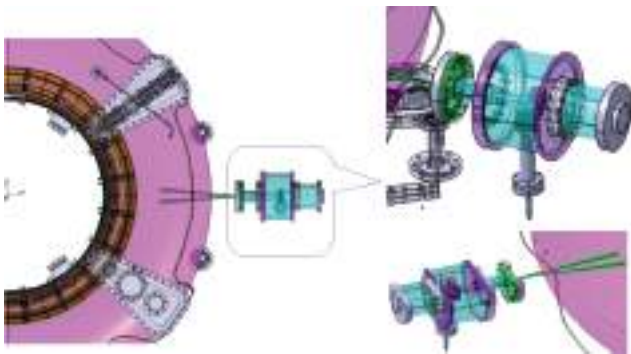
3D CAD drawing of Soft X-ray diagnostic with rotatable multi-filter assembly.
